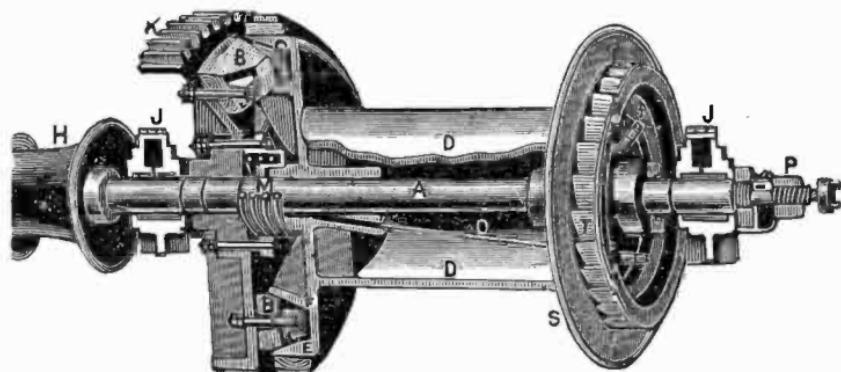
,854.—Sectional view of loose drum. The parts are: A, shaft; B, friction blocks; C, friction flange; D, drum; E and F, friction rings; H, winch head or spool; J, J, bearings; K, gear wheel; P, thrust screw; S, drum flange; T, ratchet teeth.
